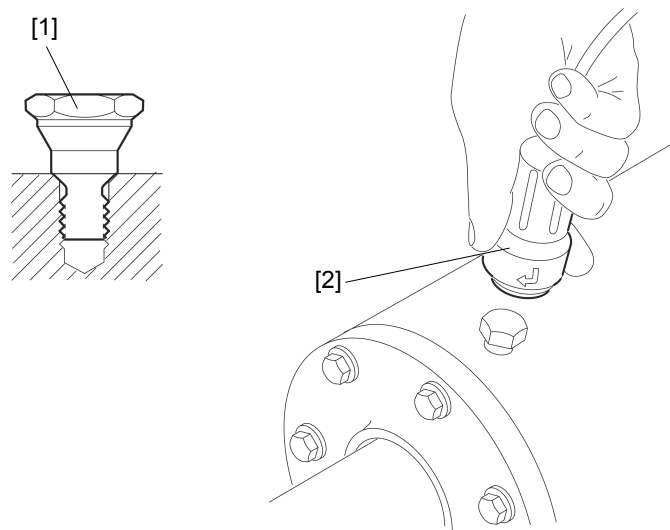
Mounting the shock pulse sensor onto the SPM adapter
